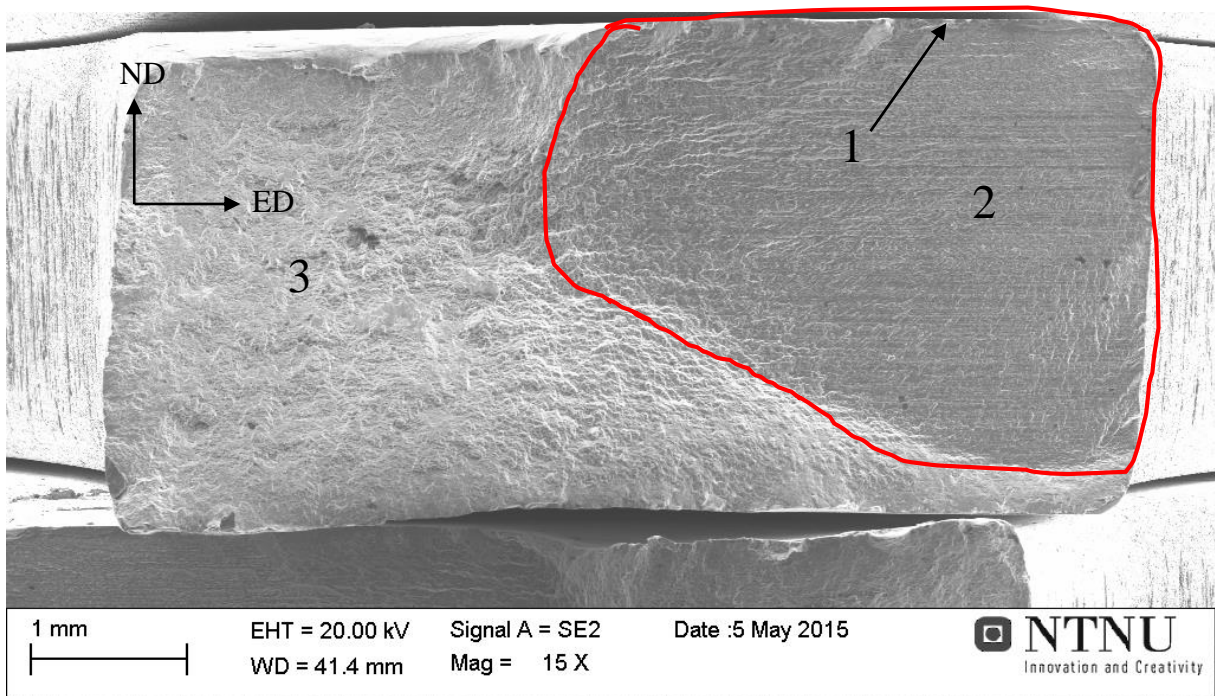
An overview of the fractured surface of AA6082 T5 with the longest fatigue life, 15X magnification. The fatigue fractured area is enclosed by the red line.
